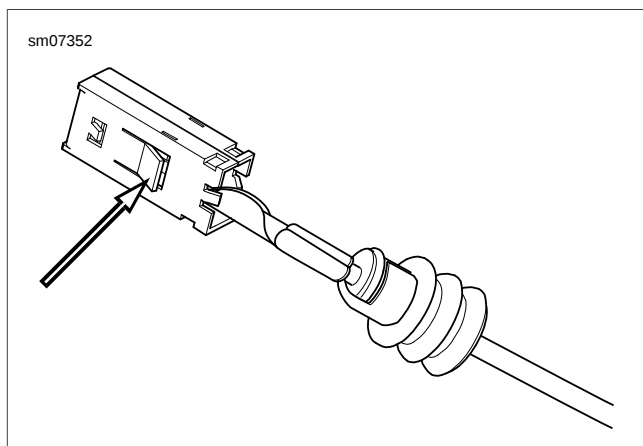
Tangs: Bosch Compact 1.1M Socket Terminal
